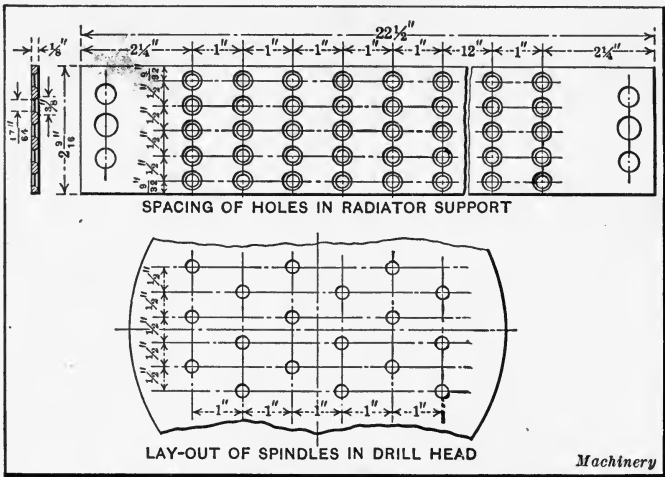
Radiator Support in which Holes are drilled with Head shown in Fig. 23 by traversing Work Sidewise and Lengthwise between Successive Operations. Below is shown Lay-out of Spindles in Drill Head
